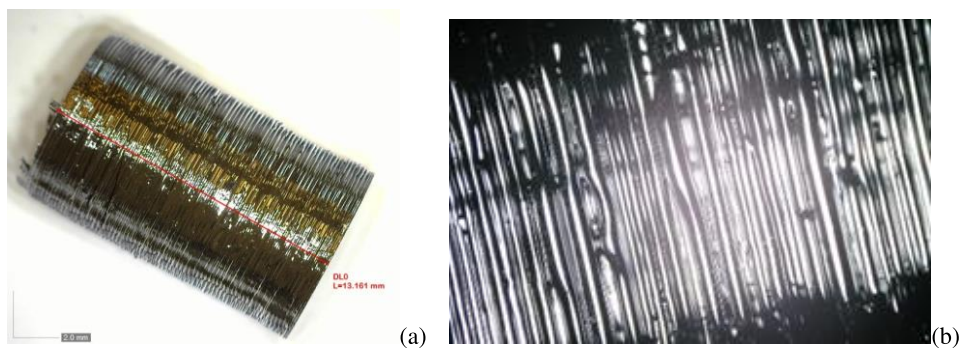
Microscope images of the side external surfaces of the printed cylinder
